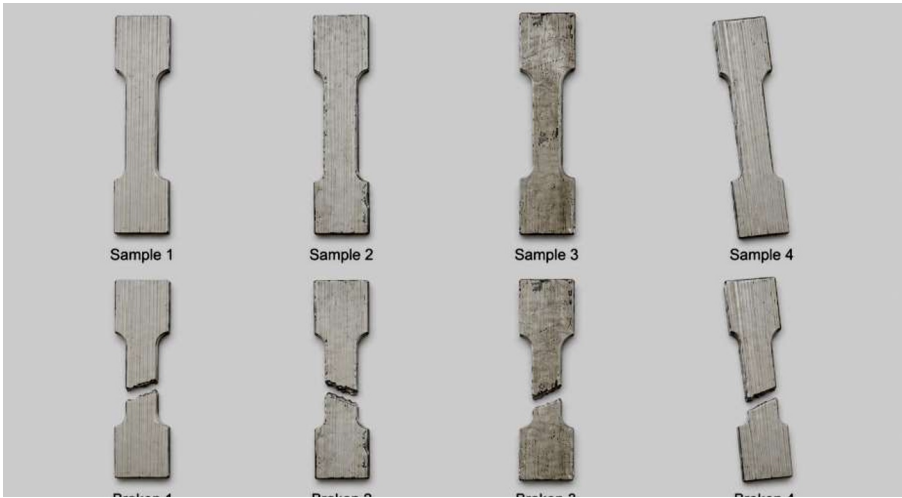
Tensile specimen before and after fracture of AA6061 by AFSD
